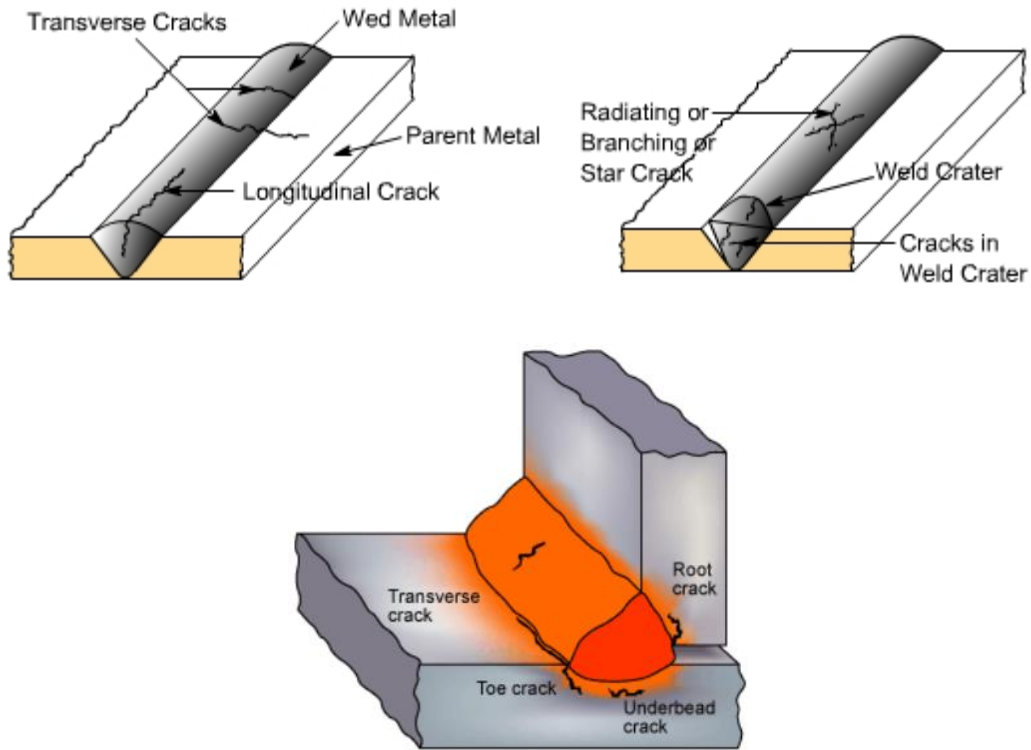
Schematic drawing of typical locations of cracks in welded joints.
